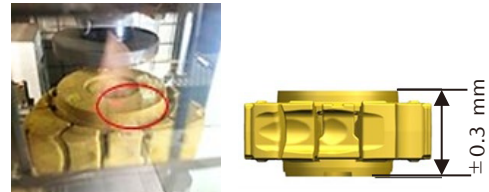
Measuring Assembly Dimension for No.1, 2 Core
